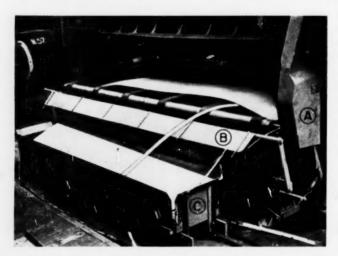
Rear view of shearing machine, showing simple belt conveyor for conveying cut pieces away from the shear blade and onto a guide plate which directs the pieces into a special truck.
